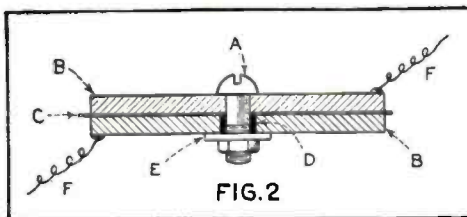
Section of assembled crystal unit. "A" is a machine screw and nut; "B," the metal plates; "C," tracing cloth bearing crystal particles; "D," insulating bushing; "E," insulating washer; "F," wire terminals
